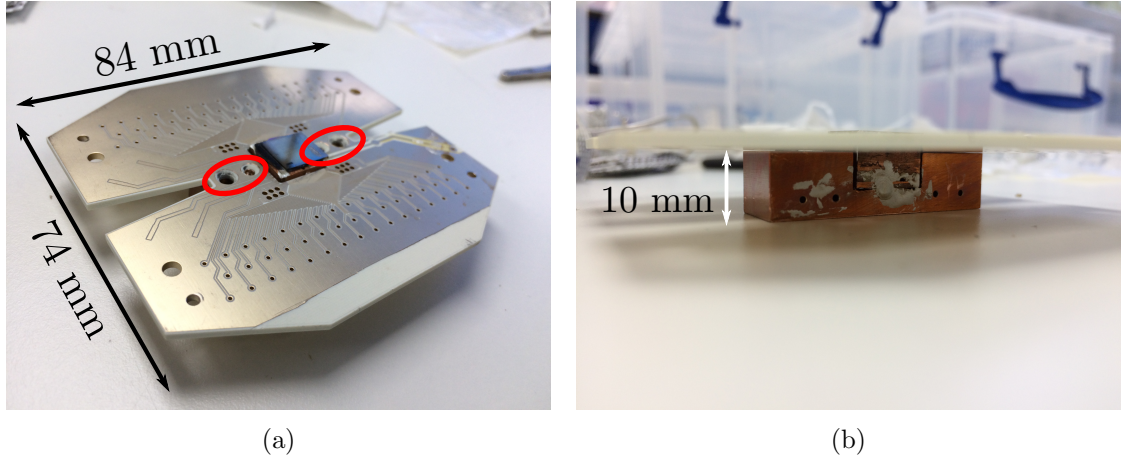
(a) The front PCB with the trap assembly mounted using a set of tapped holes highlighted in red circles. (b) On the other side of the PCB, the ion trap and spacer assembly is epoxied onto a oxygen-free copper platform for setting the correct distance between the ion trap and PCB surfaces for unobstructed laser access.
